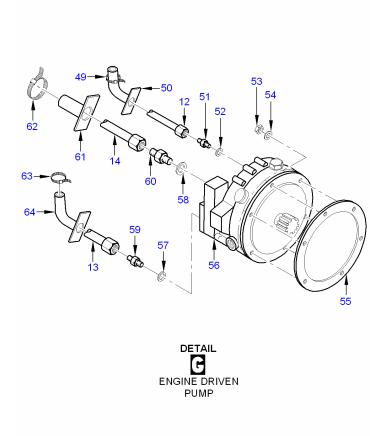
Engine Driven Pump - Removal and Installation (sheet 5/5)
